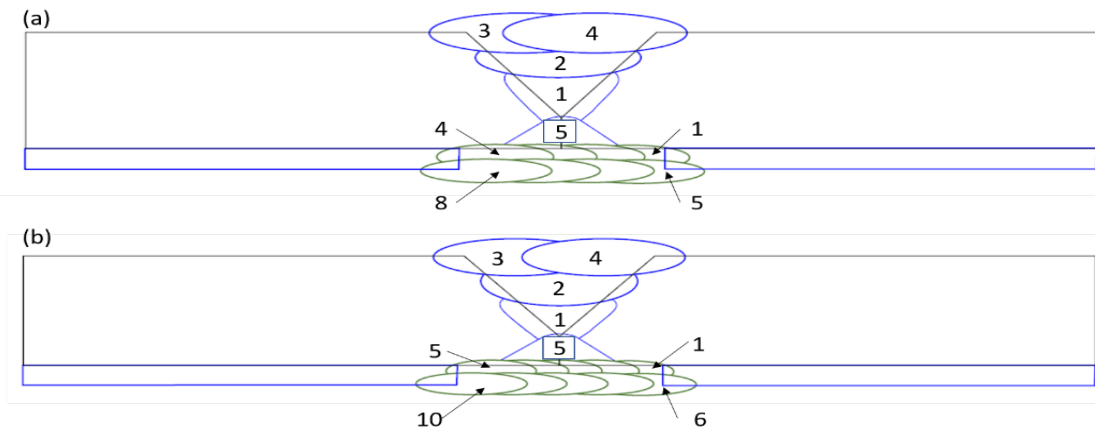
Bead placement and pass order overlay for (a) 304H/Ni201 and (b) 304H/C22 plate butt welds
